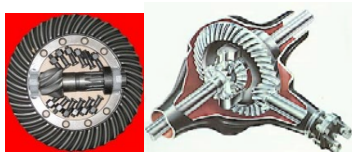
Gears for drive of a passenger car axle with transverse-engine and the longitudinally-engine made of isothermal improved irons EN-GJS-700-2
